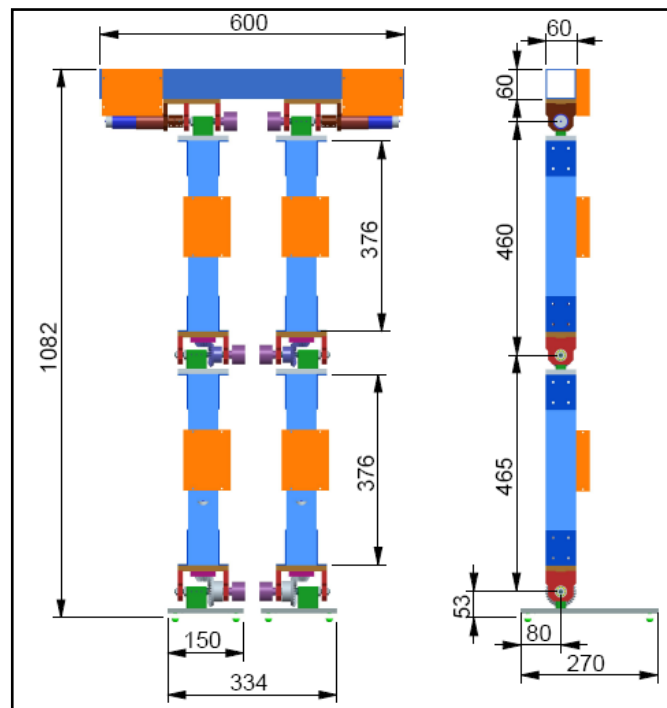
Main dimensions and segment lengths of the robot (mm)
